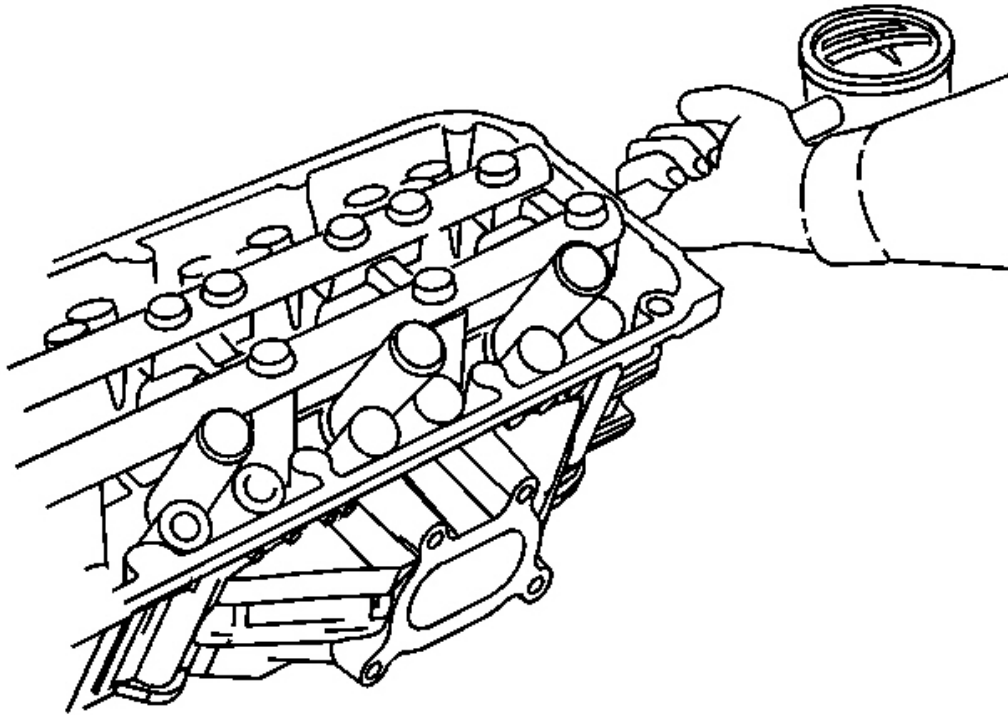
Measuring The Inside Diameter (I.D.) Of Camshaft Bearing Surface
